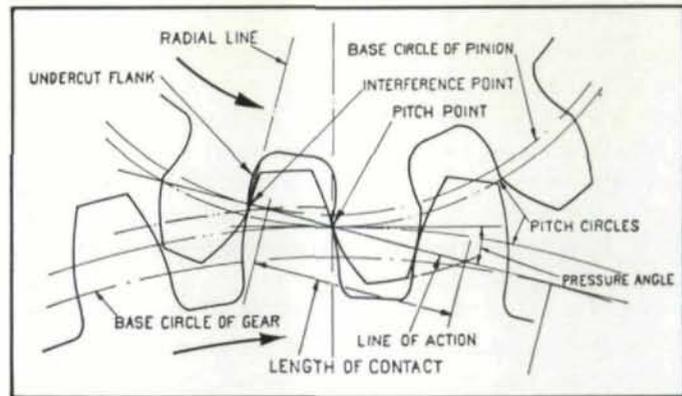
Diagram Showing Undercut Flank on Pinion Tooth to Avoid Involute Interference.
